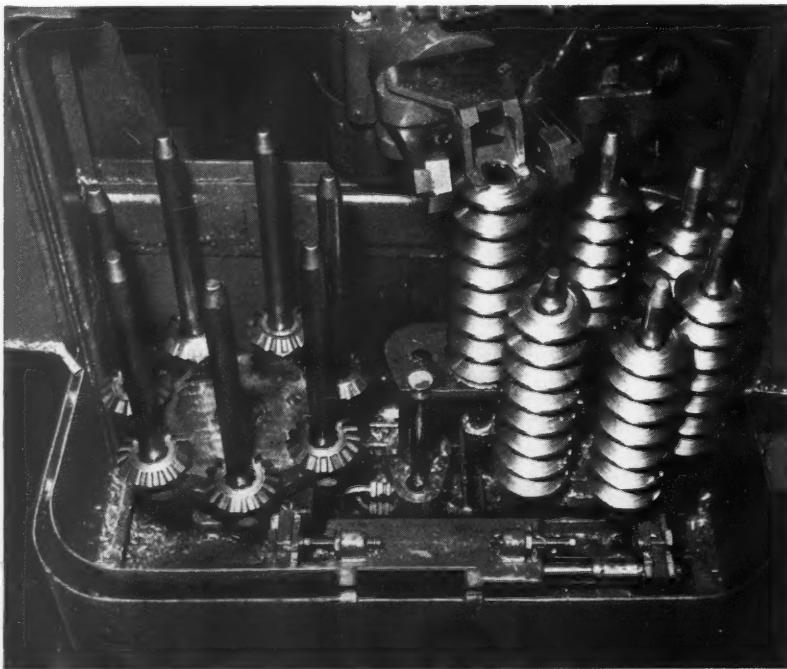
A stack of gear blanks is hydraulically lifted and the top blank is gripped by a pair of jaws on a swinging arm, which carries the blank to the work head and slides it onto an arbor
